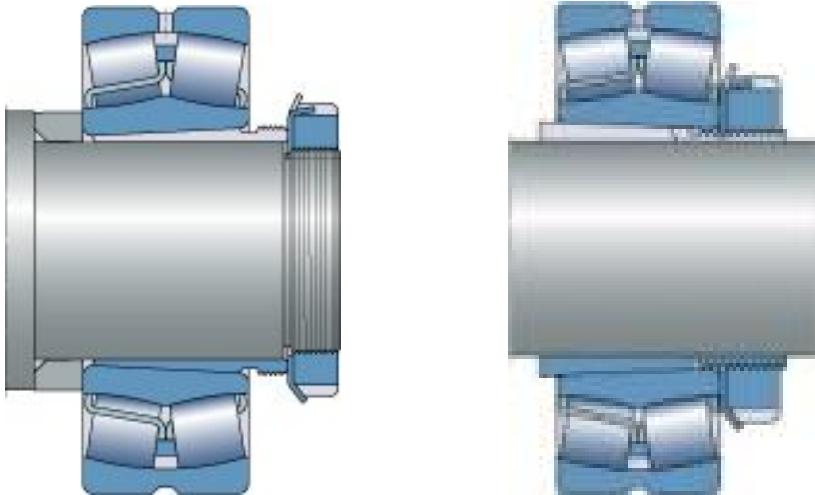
Mounting of a double barrel bearing on a withdrawal (left) and adapter sleeve (right) [SKF]
